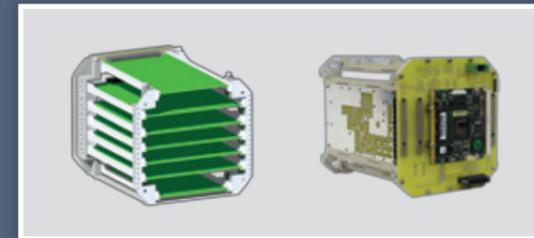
3D CAD design and photograph of rack for onboard electronics
